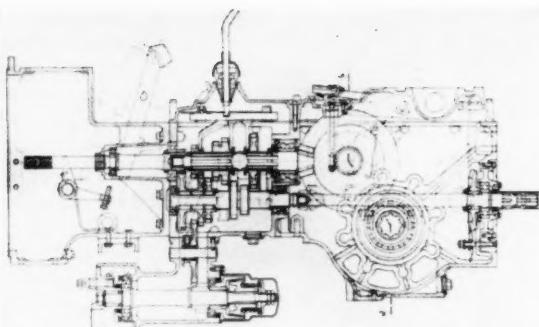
Longitudinal section of ZF transmission (Friedrichshafen Gear Works)
